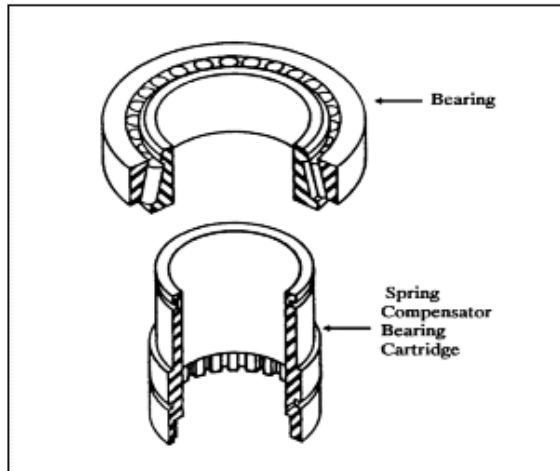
SB Belleville Spring Assembly with Bearing Cartridge
